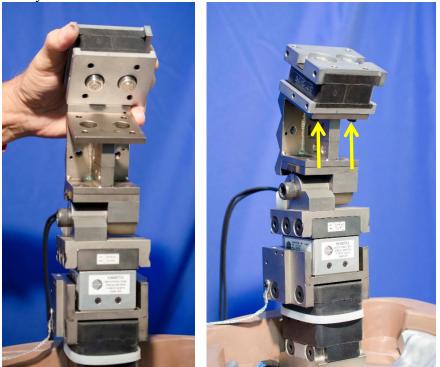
Upper flex joint assembled to lower thoracic spine assembly
